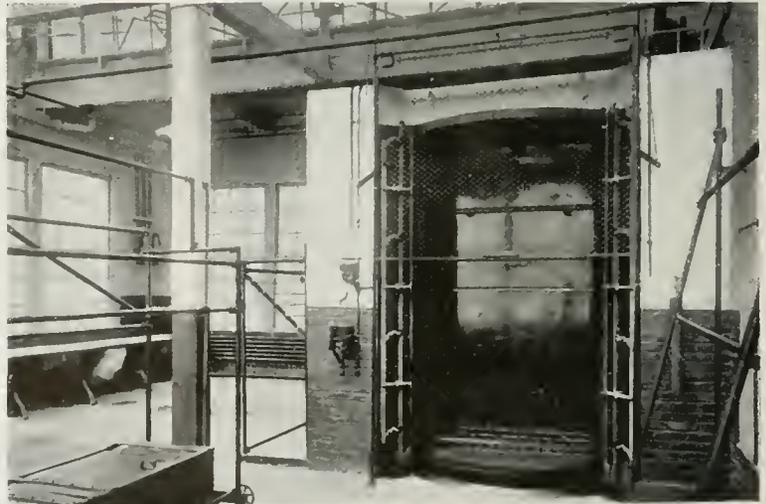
Painting and Baking Room showing Paint Bench and Electrically Heated Revolving Oven—Oven in Loading Position
